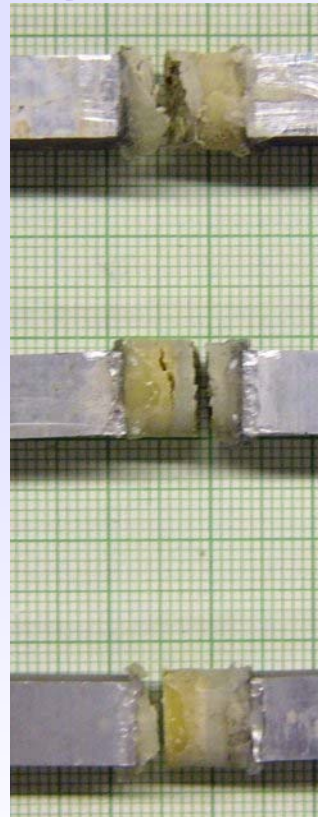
Tested Specimens of Co-Layered Material at @ 63° C. Failure did not occur at layered seam
